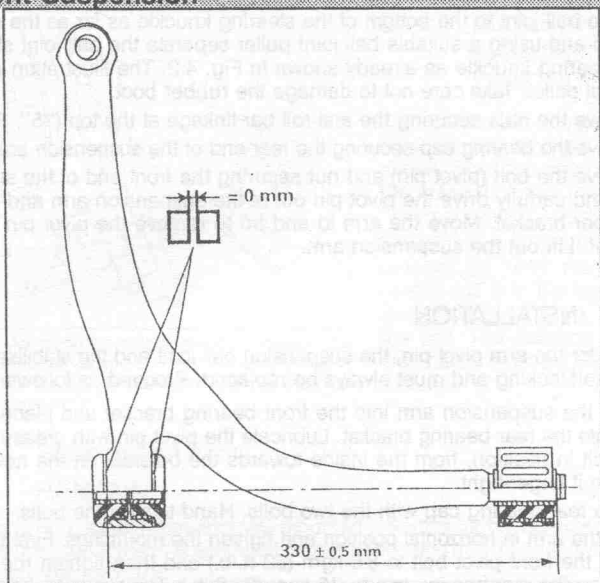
The suspension arm bushes must be fitted in accordance with the dimension shown. The flanges of the front bush halves must be pressed tight against the mounting eye of the arm.
